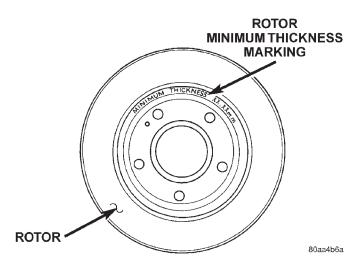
Minimum Brake Rotor Thickness Markings (Typical)
